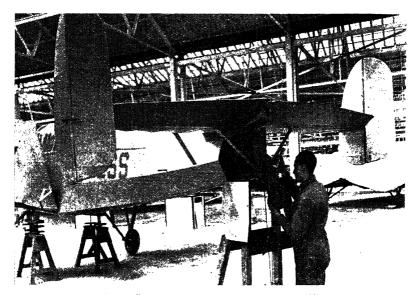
Inspect tall unit and tall wheel (2). Checking tail wheel mounting for any signs of slackness in bearings, etc.
